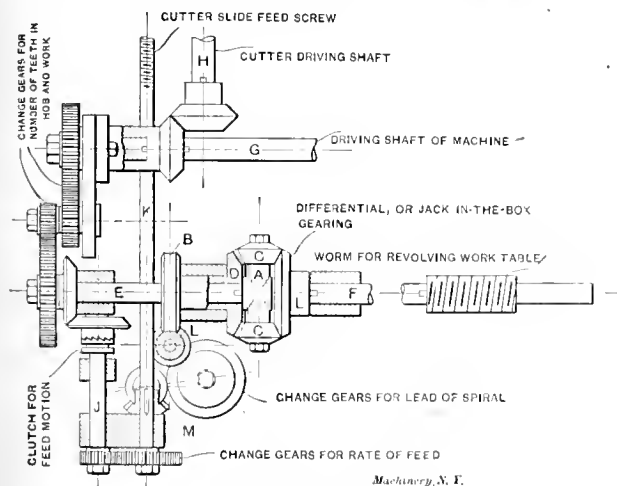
Typical Arrangement of Gearing for Spiral Gear Hobbing Machine.
